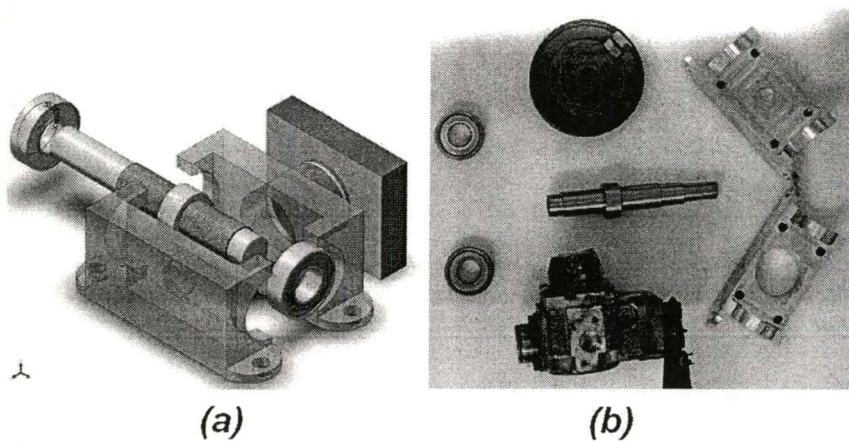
Cam-driven case (a) explode view of CAD image and (b) Assembly parts for cam-driven case.
